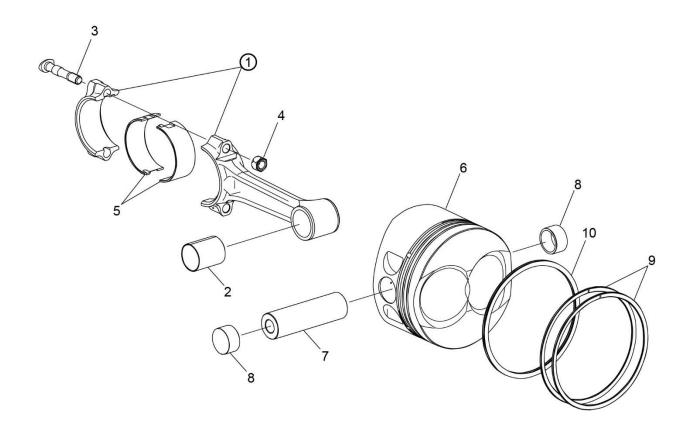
Connecting Rods, Pistons, and Ring Assemblies
